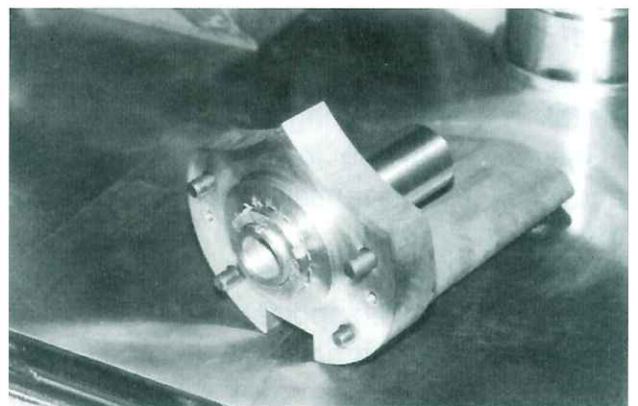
Unloader Slide Valve (2pcs.) (55)
